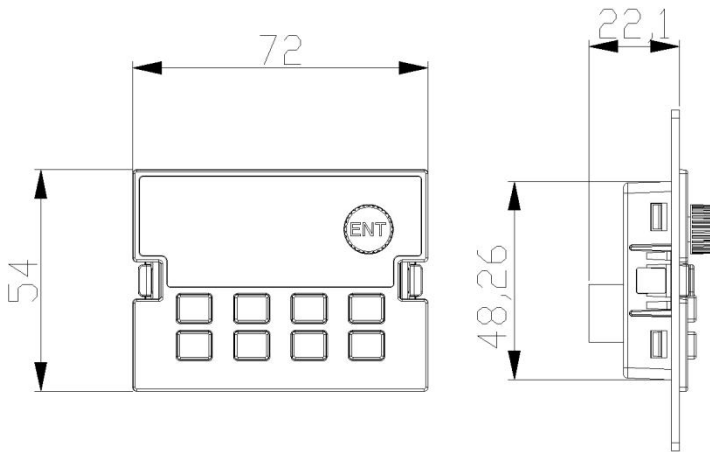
Keypad appearance and dimensions of 22kW and below (unit: mm)
